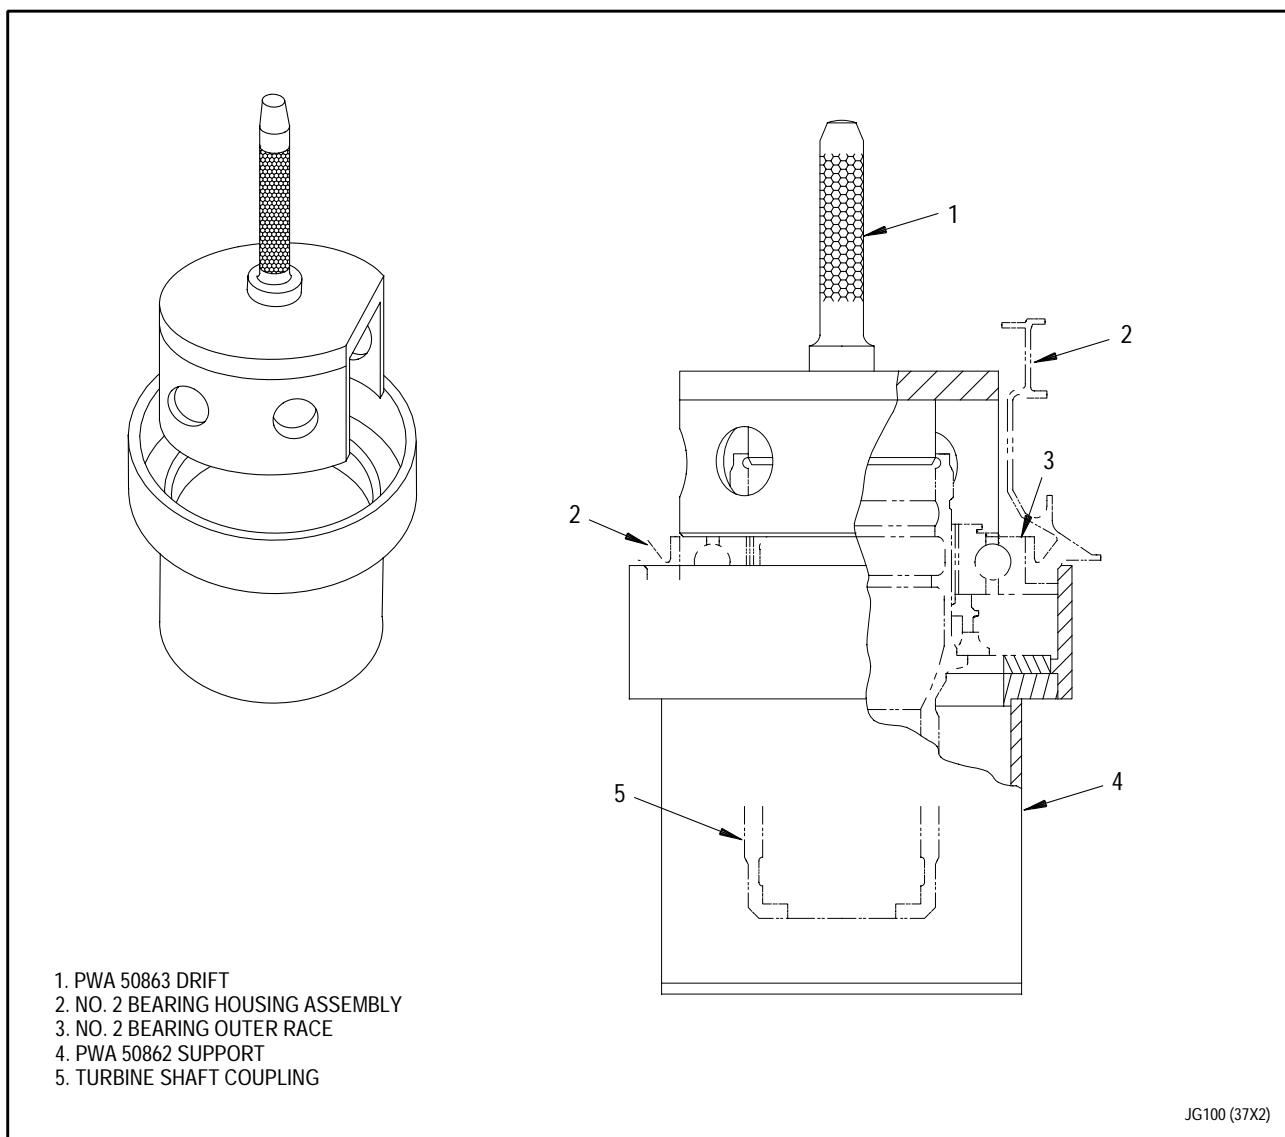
No. 2 Bearing and Coupling - Removal Tooling
